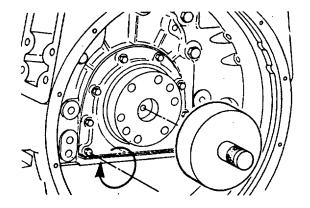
Checking Rear Cover and Oil Pan Flange.
